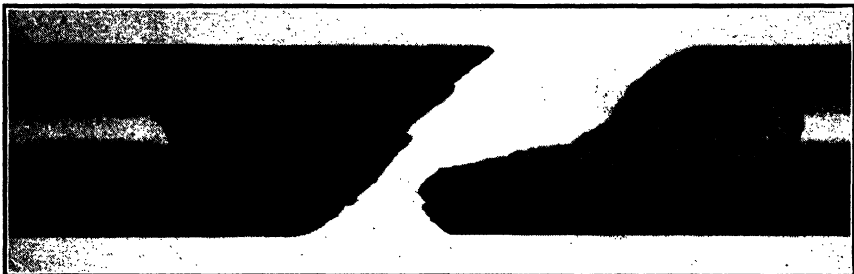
Tensile failure of a cast-iron torsion specimen.
